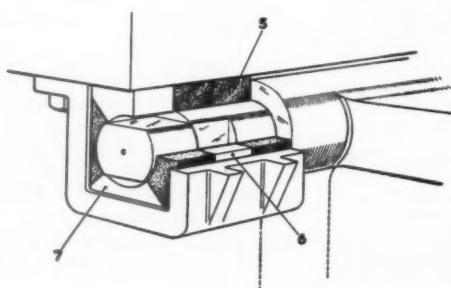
Design for a composite heat resisting bearing to withstand loads in two planes
